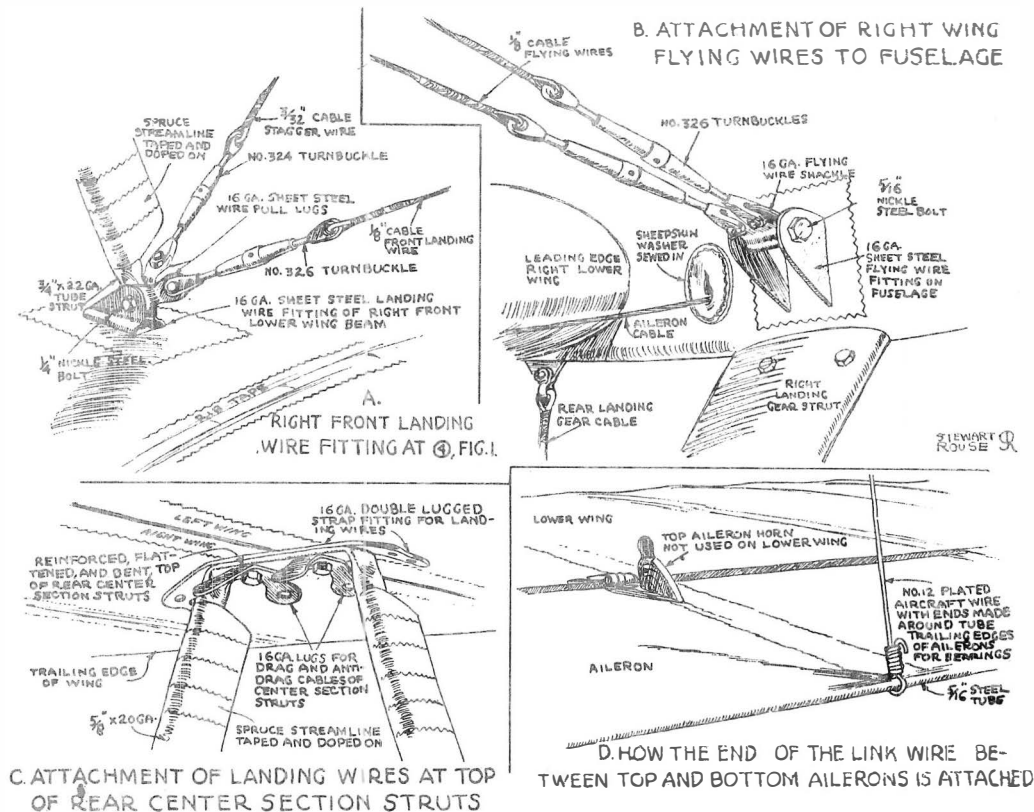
Strut, wire, and aileron details which will be helpful in converting the Heath "Parasol" into the "Super-Soarer." It will be noticed that the top aileron horn is not necessary on the lower wing, while the bottom one will not be used on the upper wing, since the two ailerons work together.
